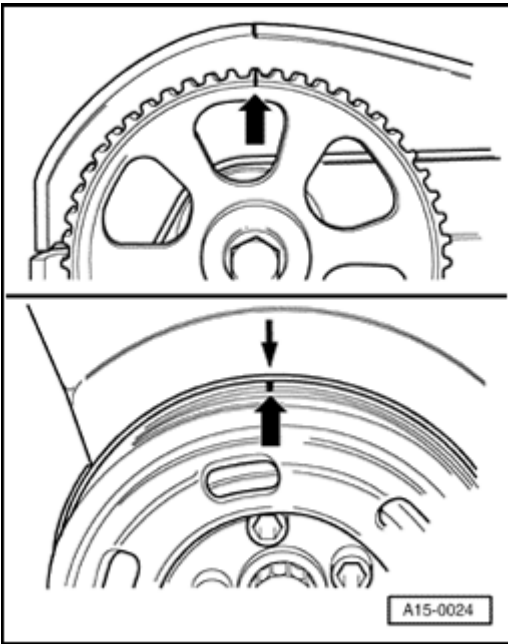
Setting Crankshaft To Markings For TDC Of No. 1 Cylinder
